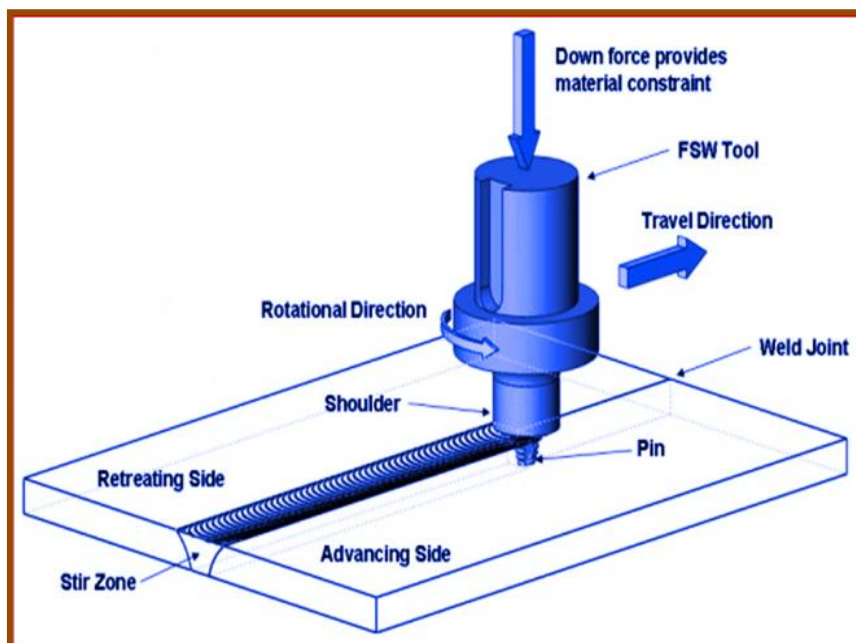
Basic principles of friction stir welding (Ref.EWI)
